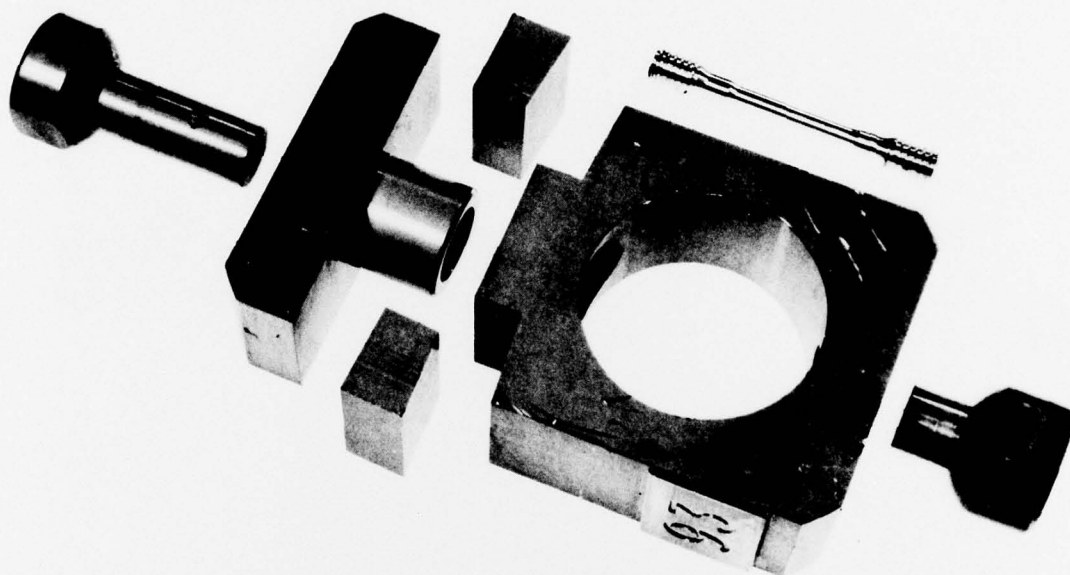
Exploded view of RAE one piece stress corrosion test rig and test piece
